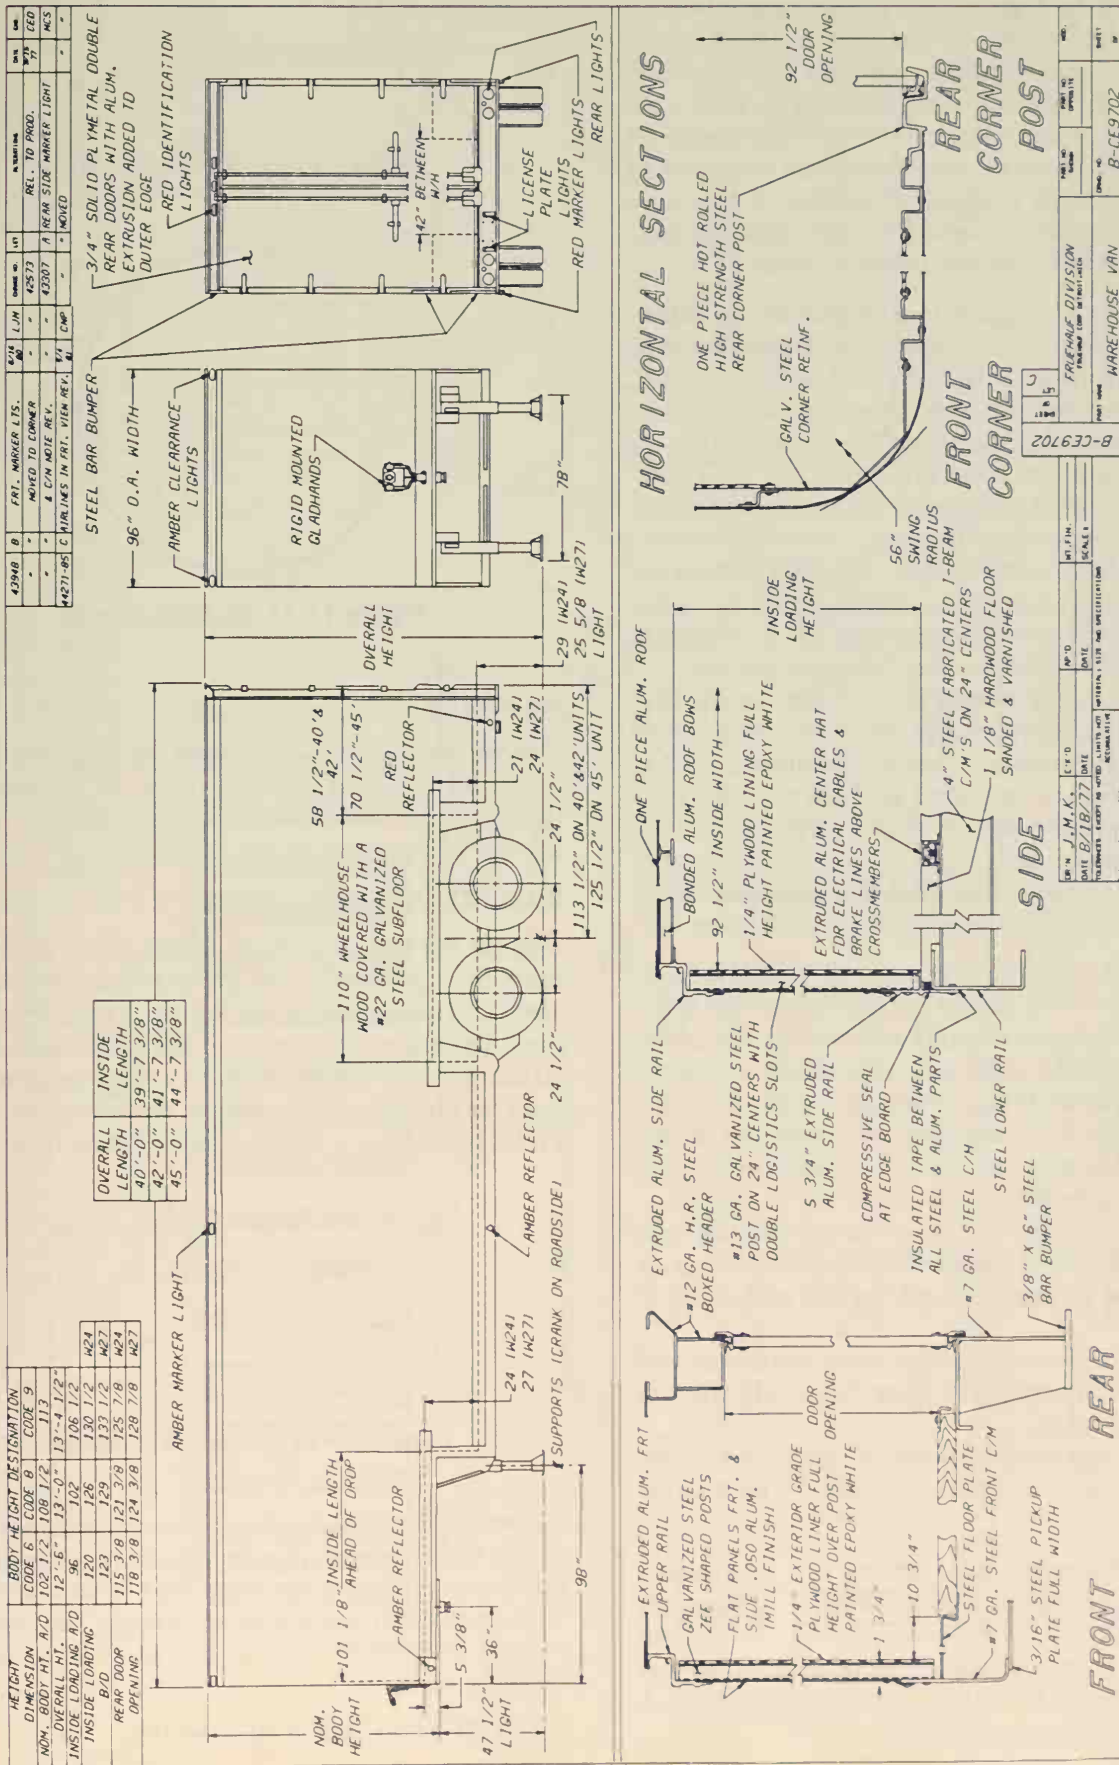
Sample CAD drawing (Courtesy Fruehauf Division, Fruehauf Corp.)
